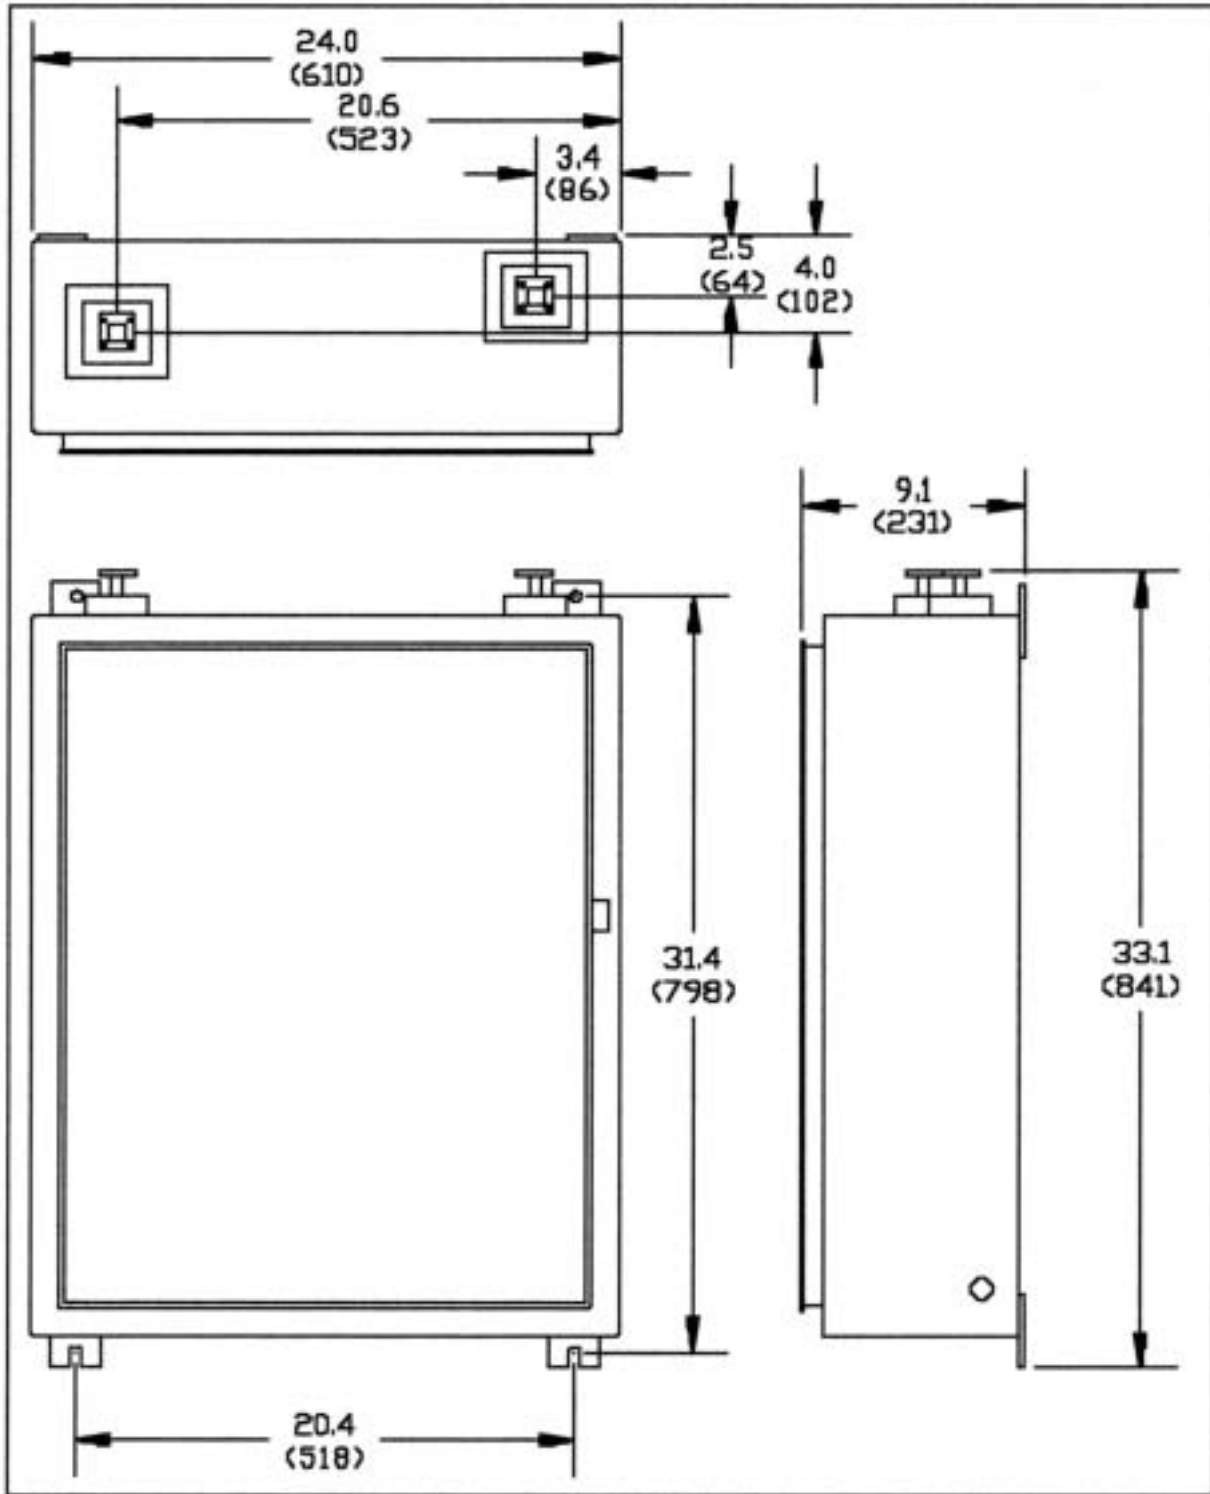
Cabinet Mounting Dimensions, RF-13000, -01 and -02 (shown in inches and mm)
